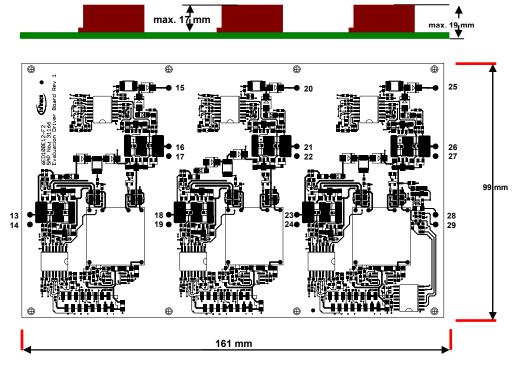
Dimensions of the 6ED100E12-F2 Driver Board
